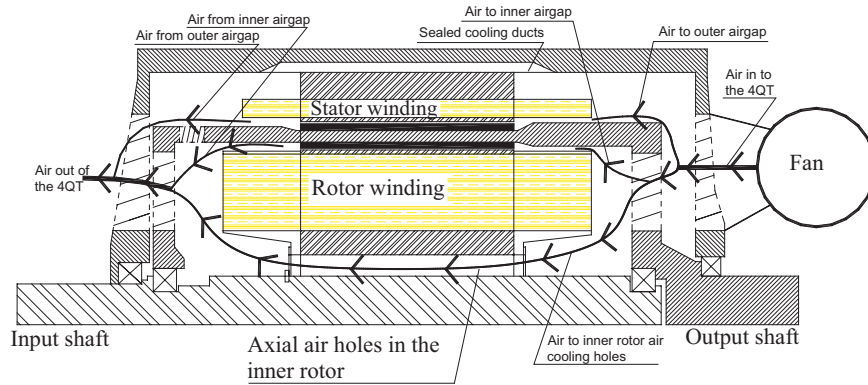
New forced air cooling system for the inner rotor of the 4QT prototype machine.
